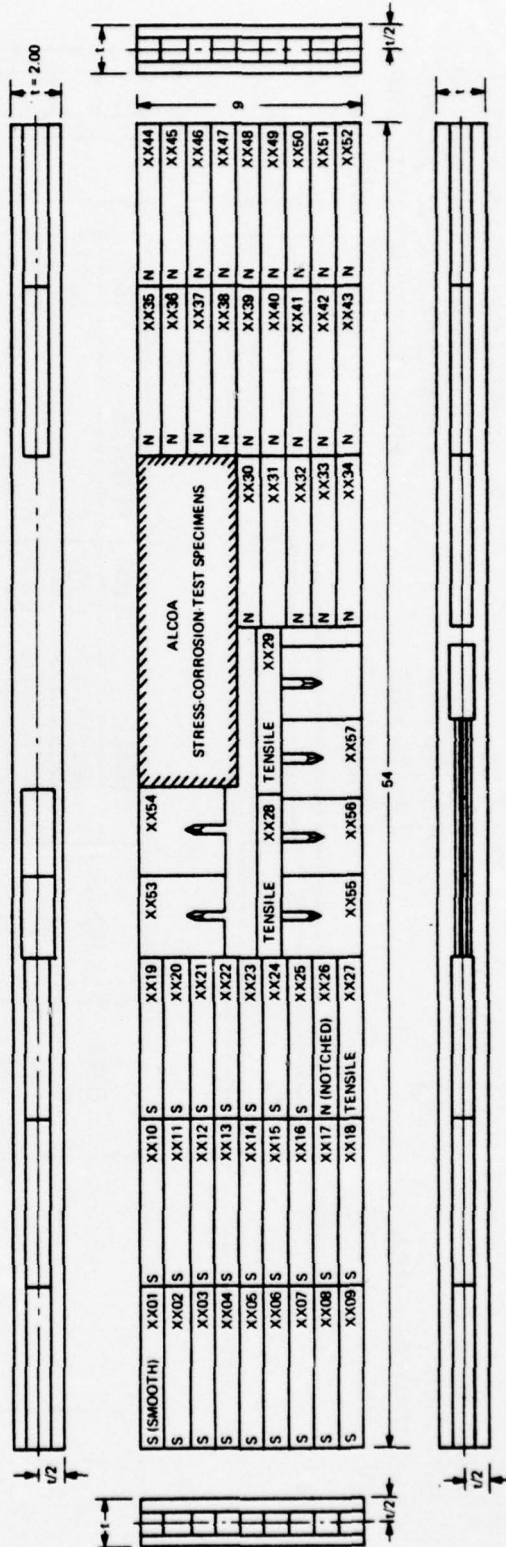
Two-Inch-Thick Forging for Specimens XX01 Through XX57.
